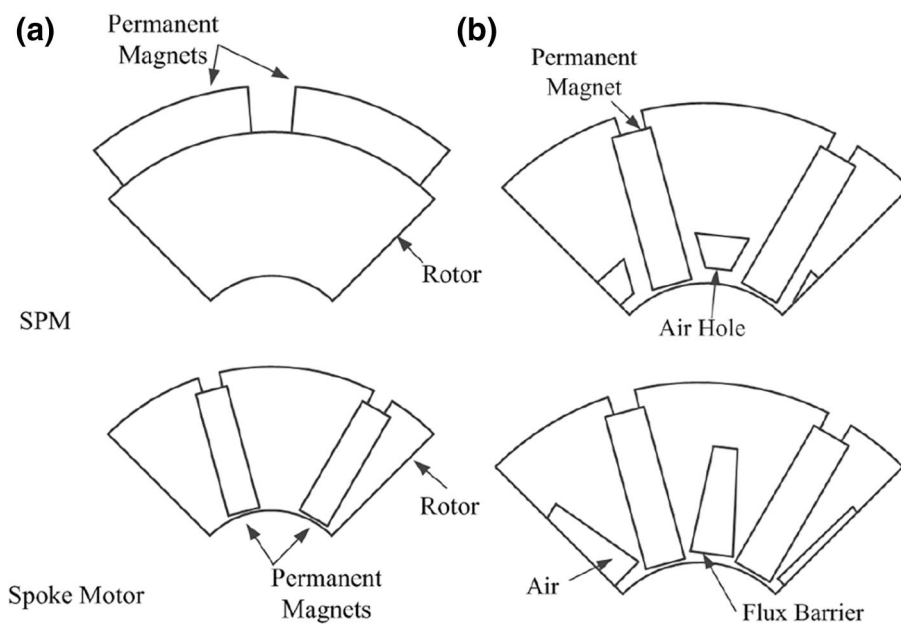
(a) The rotor design of SPM and spoke motor [39]. (b) Air hole and flux barrier design of the spoke motor [39]
